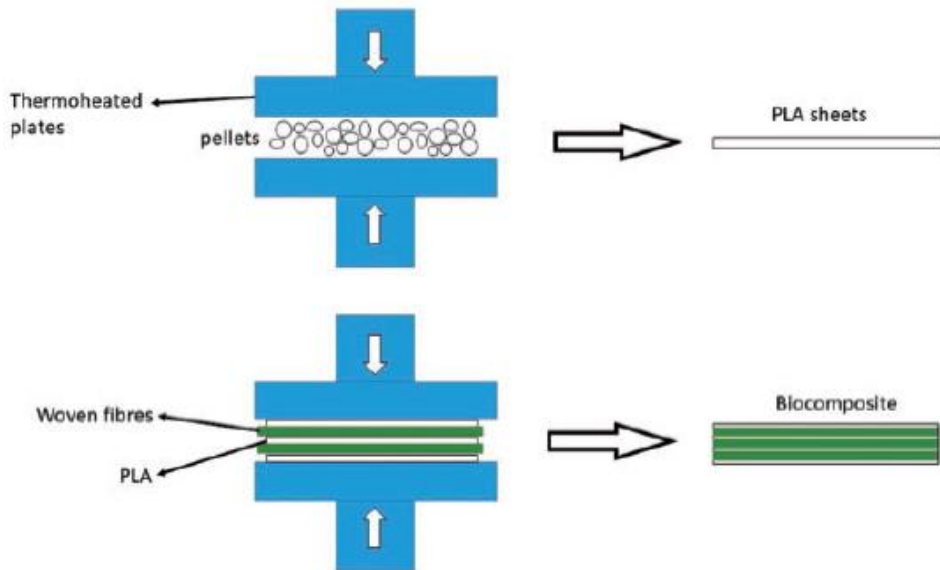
Flax/PLA (BF/PLA10) biocomposite manufacture route through compression molding method [31].
